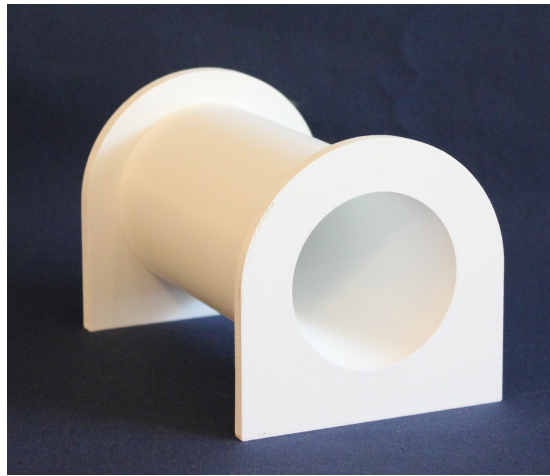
SISO - Nozzle - Prototype - Aft View
